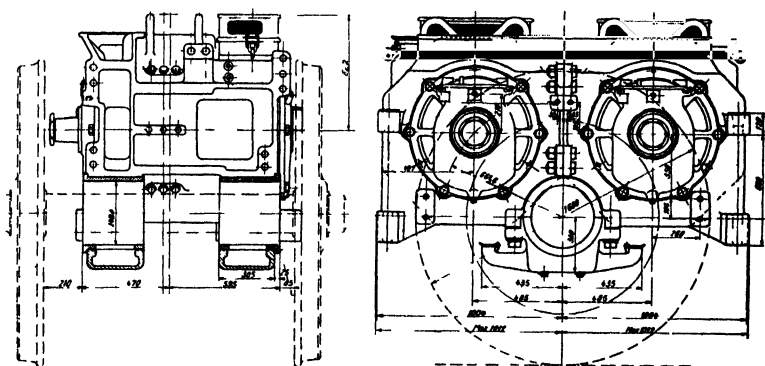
GENERAL ARRANGEMENT OF TWIN MOTOR AND DRIVING AXLE (OERLIKON)
